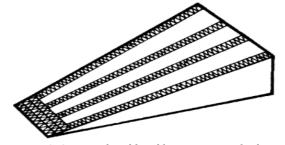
Stringer bead hardfacing pattern for large aggregates [53]
